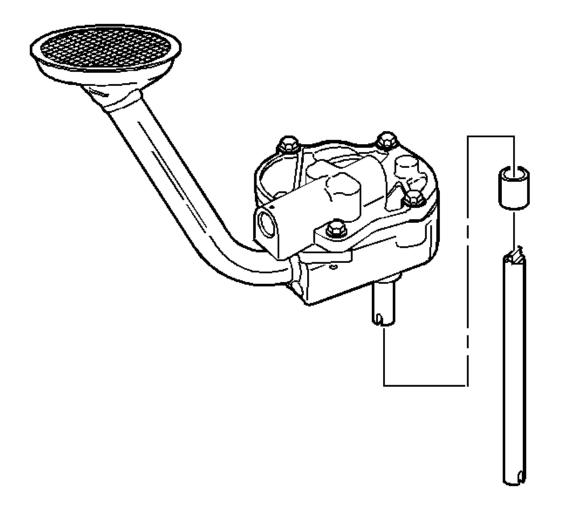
View Of Oil Pump Driveshaft & Retainer Courtesy of GENERAL MOTORS CORP.
